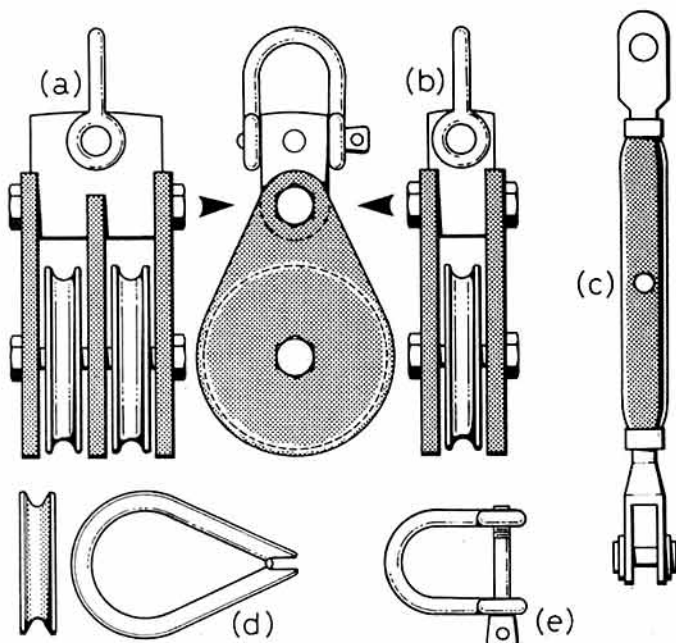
(a) Twin-sheave marine type block. (b) Single-sheave block. (c) Rigging screw. (d) Heart-shaped thimble. (e) "D" shackle
